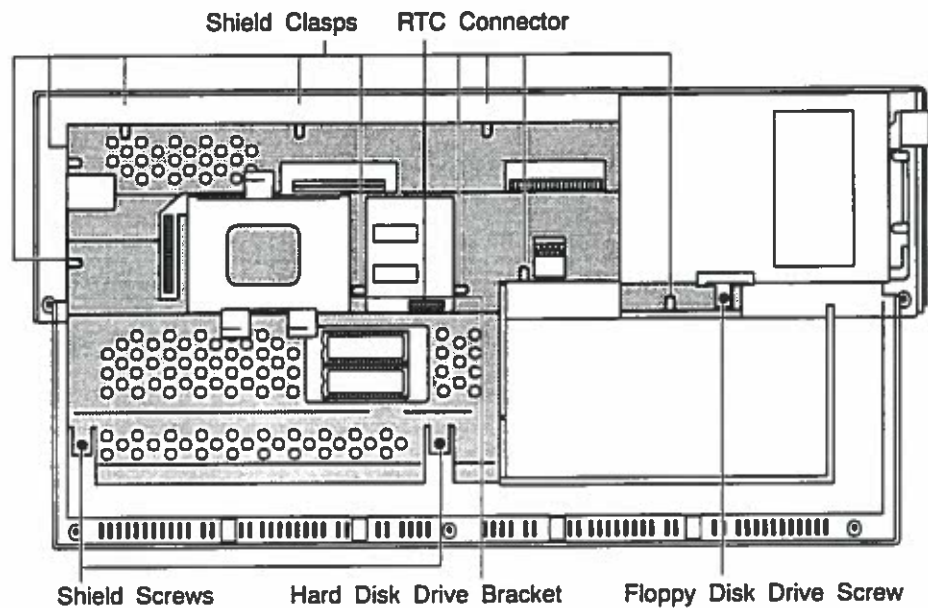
Removing the Hard Disk Drive, Floppy Disk Drive and Shield
